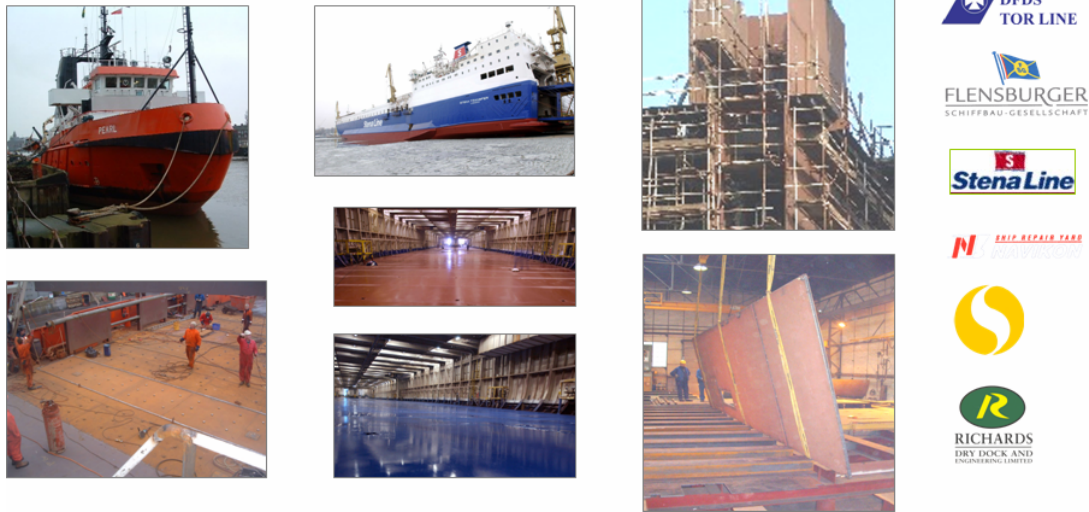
Plated structures without stiffeners for ship hulls and bridges [IE-Engineering, Canada]
